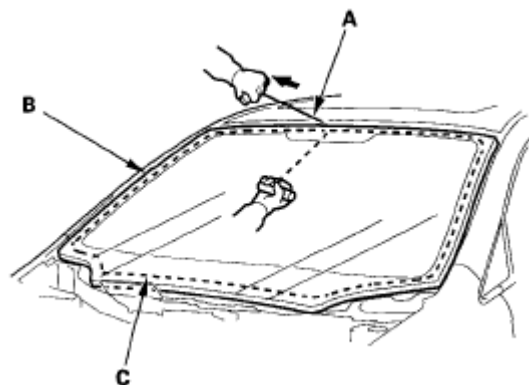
Cutting Through Rubber Dam And Adhesive Around Windshield
